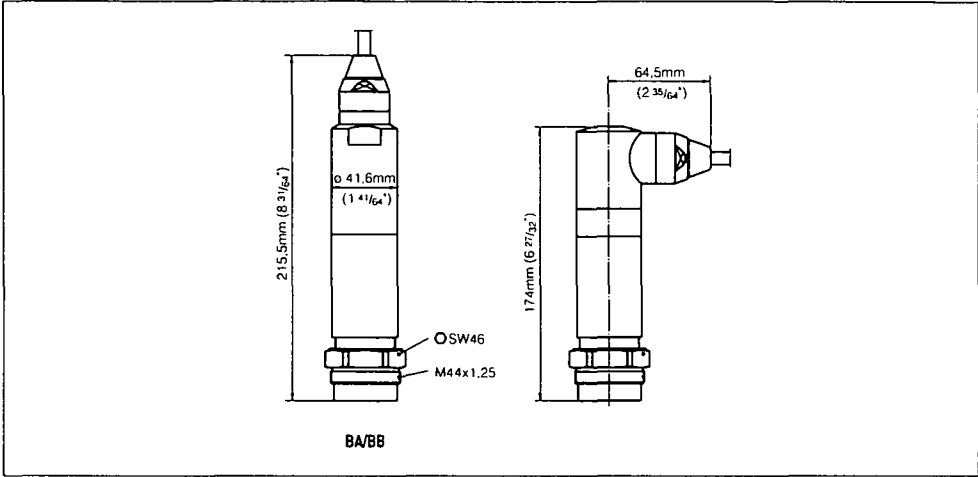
VEGABAR 74 - connection for paper industry: BA/BB = M44x1.25
